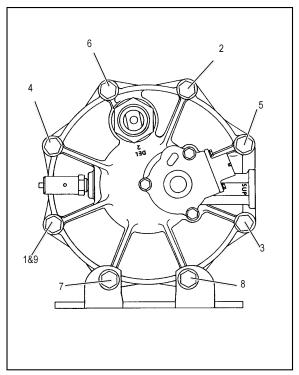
END COVER TO HOUSING TORQUE PATTERN
